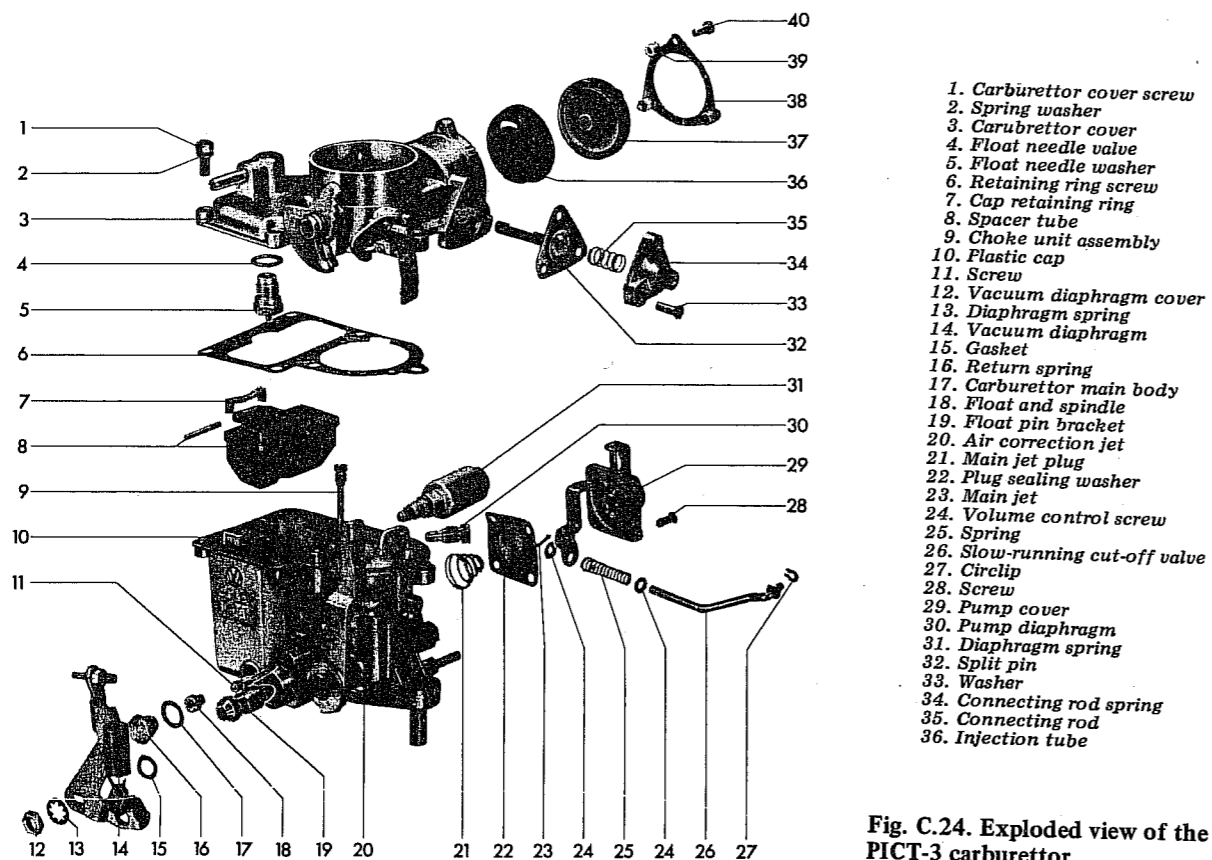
Exploded view of the Solex 30 PICT-3 carburettor.
